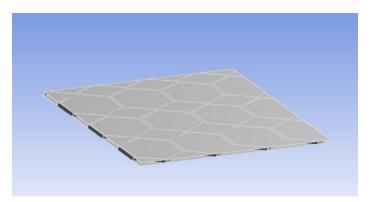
Stiffened Sandwich plate having hexagonal stiffeners
